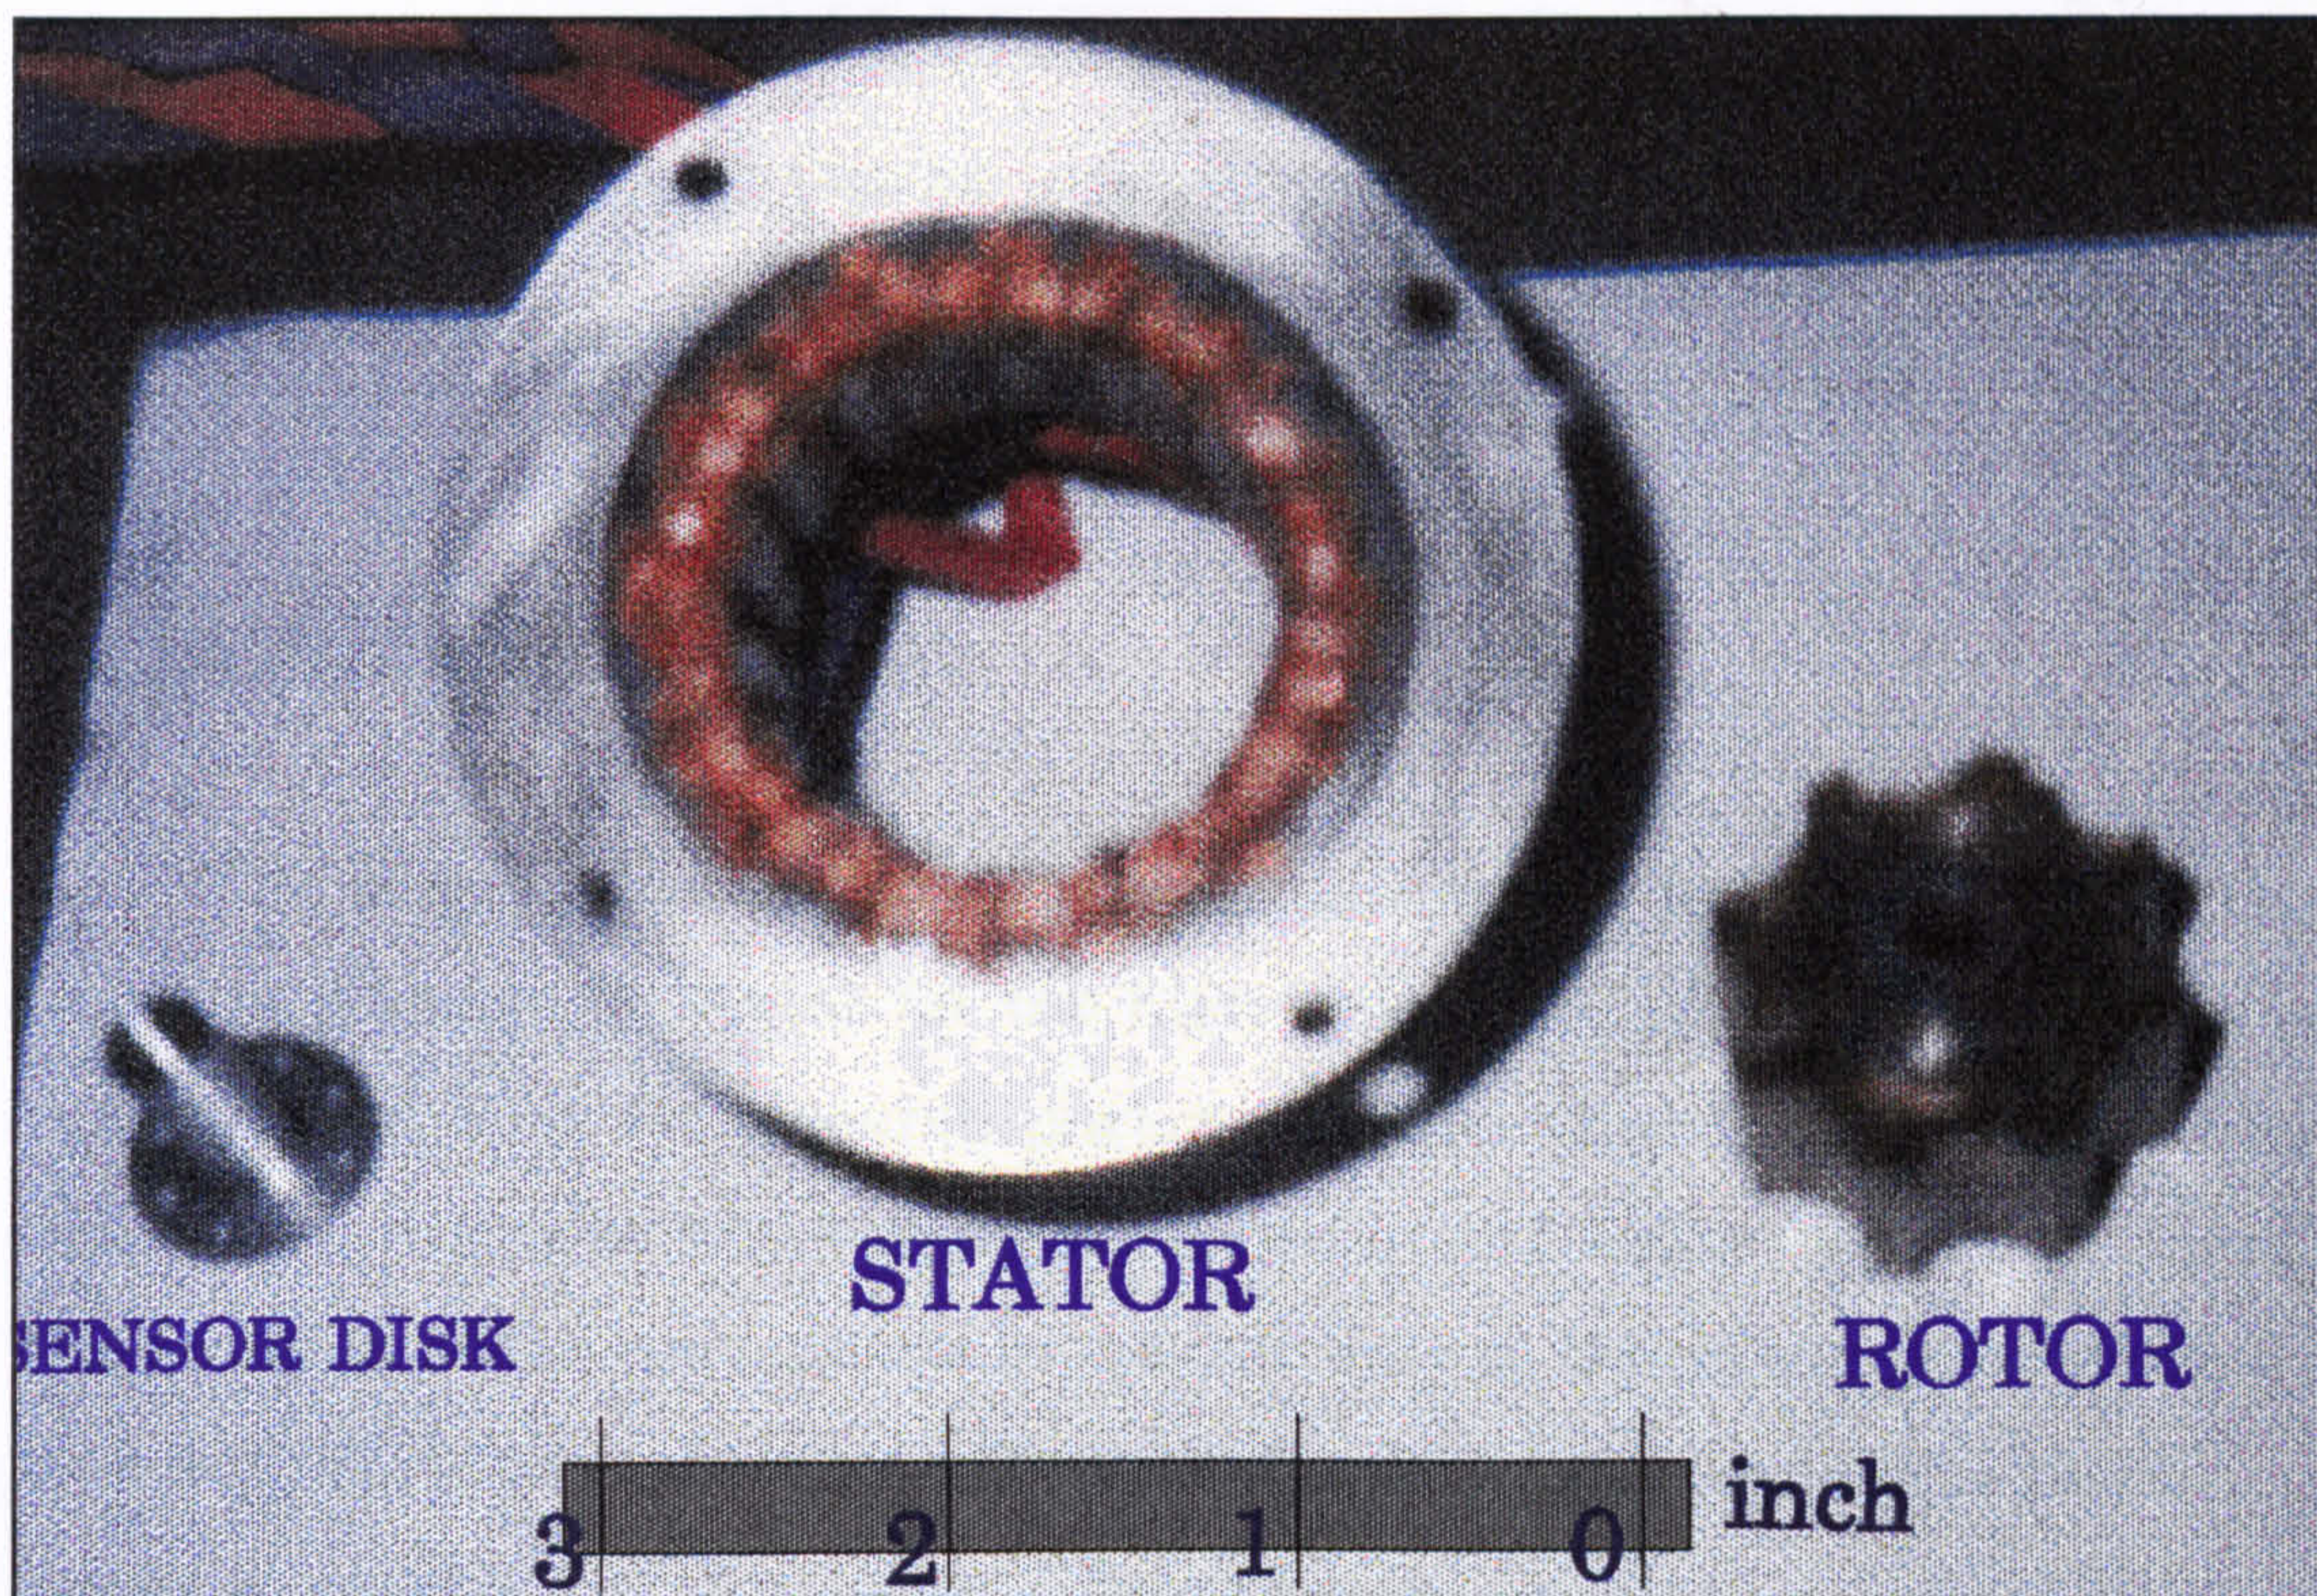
Photo-1; The stator, the rotor, and the sensor disk.
